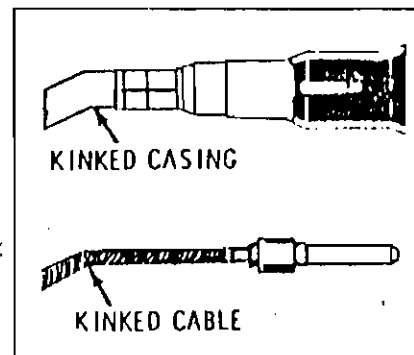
A kink in a cable housing (labeled casing in illustration) may be corrected by reshaping. A kinked cable, however, should be replaced.
